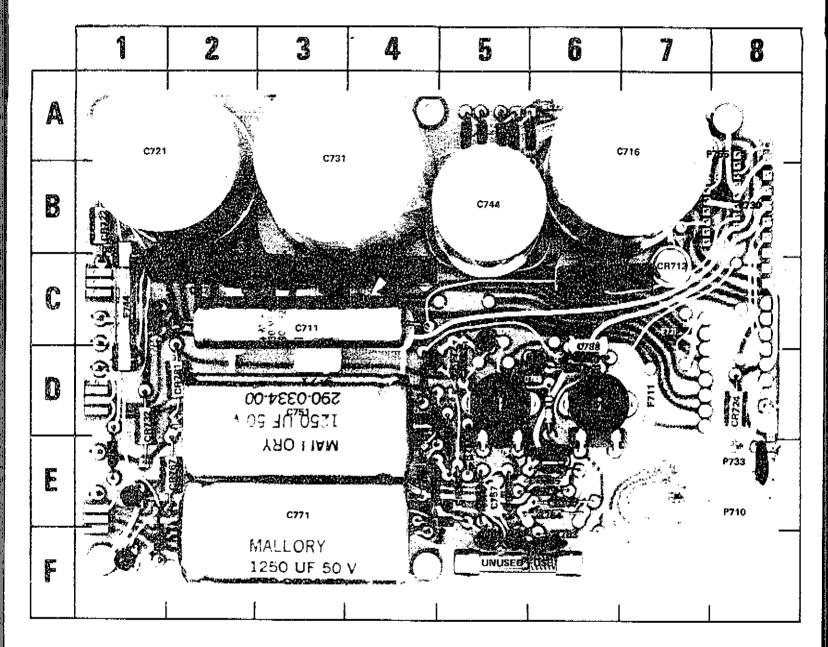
A. A3 Regulator circuit board SN B050000-up.
